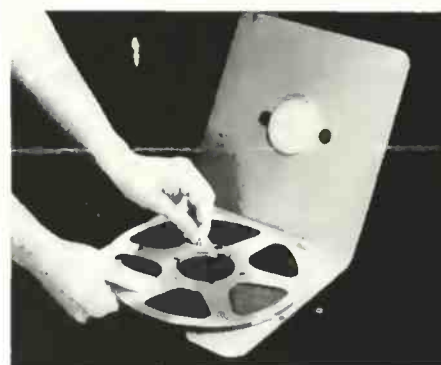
FIG. D. — Inner section of box in same position as Fig. C, showing one reel flange in place and sleeve screws being inserted.
